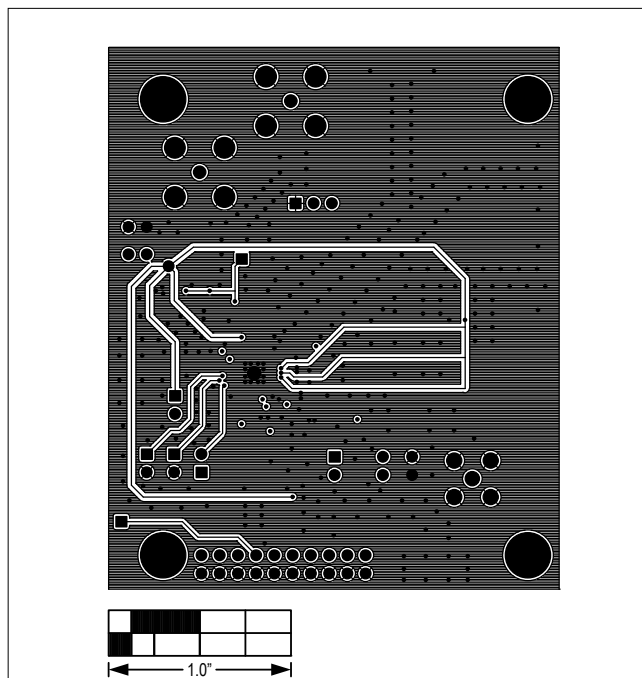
MAX2150 EV Kit PCB Layout—Layer 3
